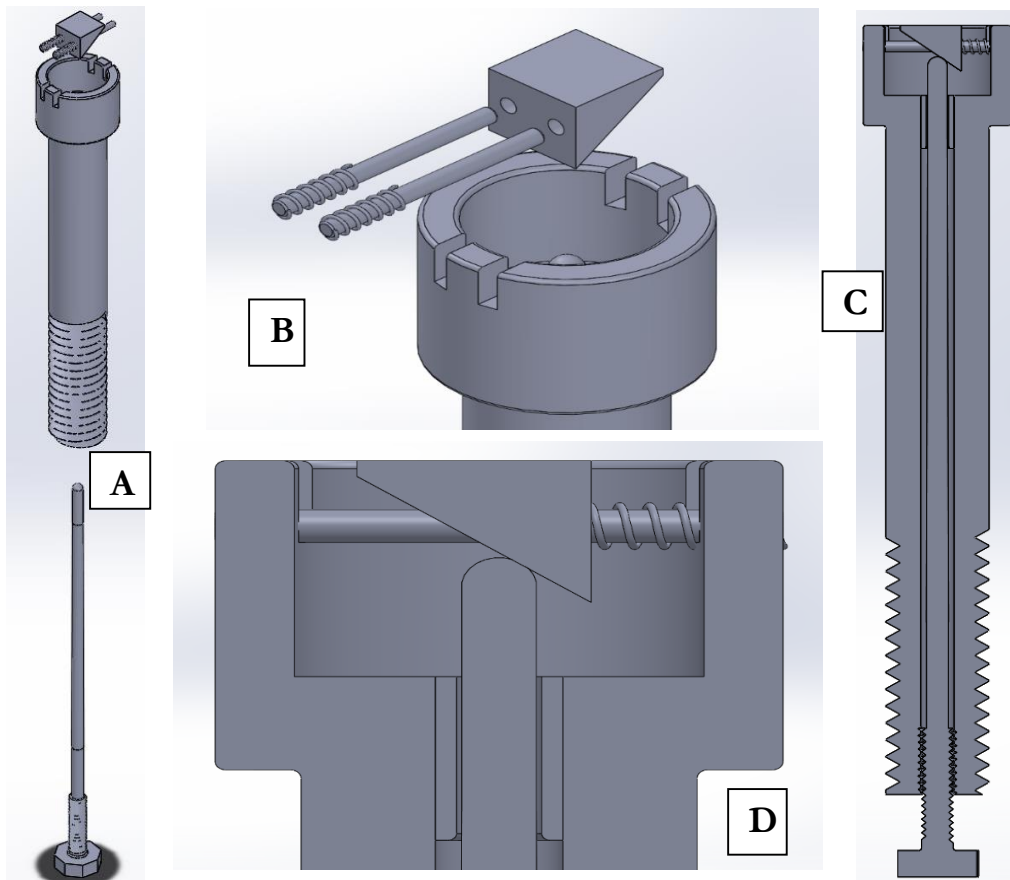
A) and B) Exploded views, C) and D) Mid-sectional views
